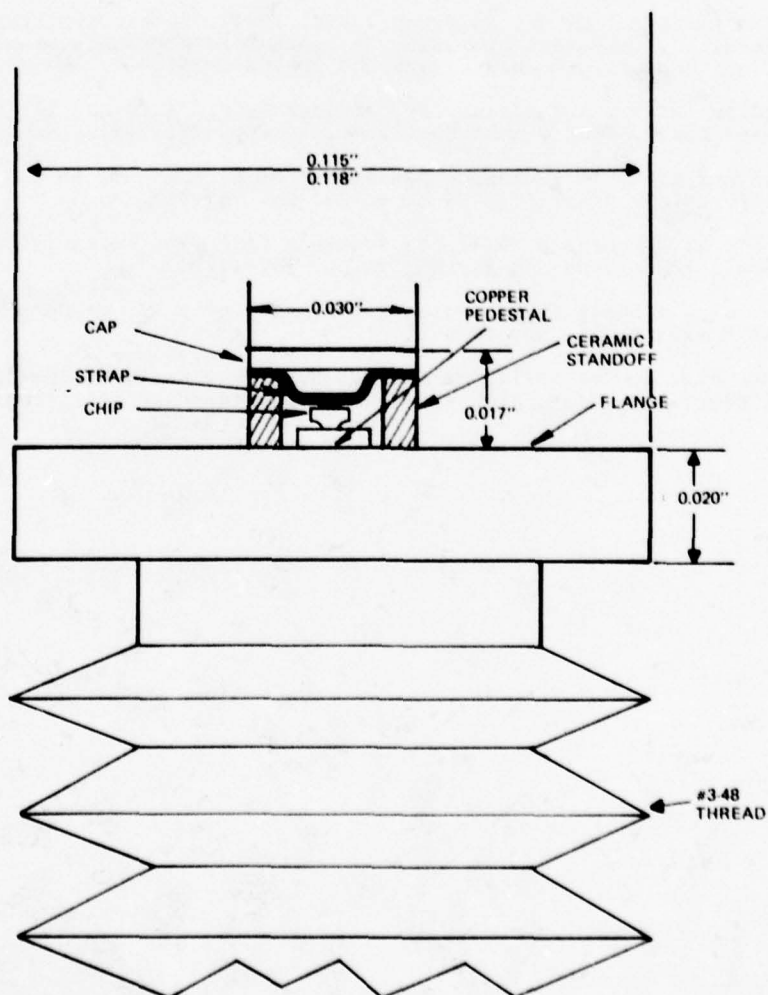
CROSS SECTION OF A STANDARD PACKAGED MILLIMETER GUNN DIODE
